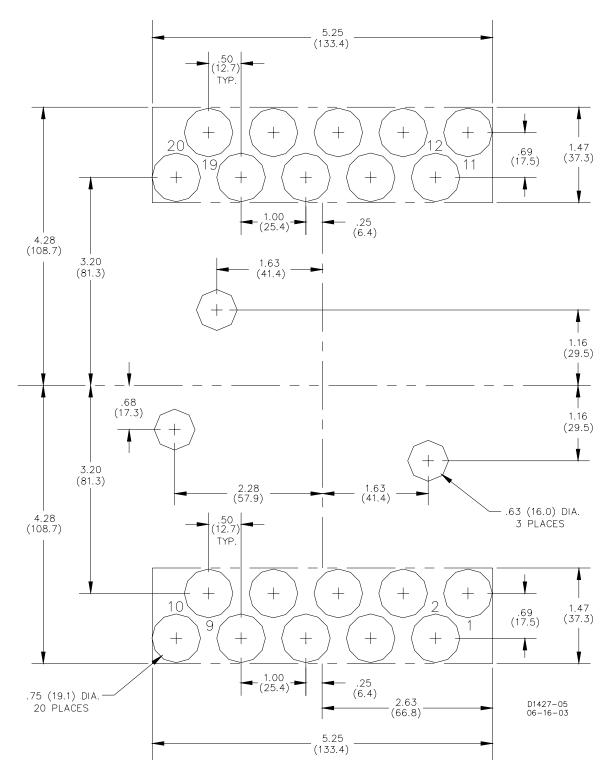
Panel Drilling Dimensions, Projection Mounting, Double-Ended Case
